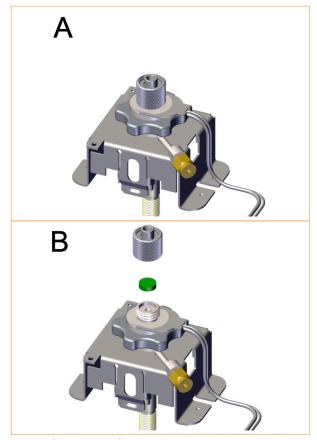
A) CAP injector. B) Exploded CAP diagram highlighting placement of the septum and septum nut.
